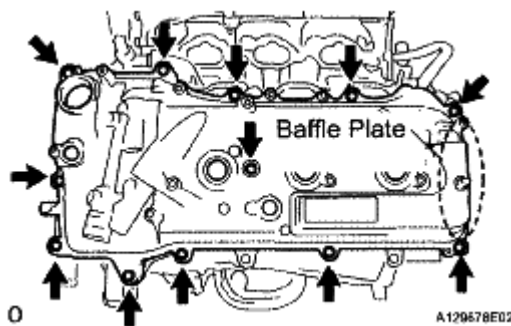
Removing Bolts, Seal Washer, Head Cover And Gasket
